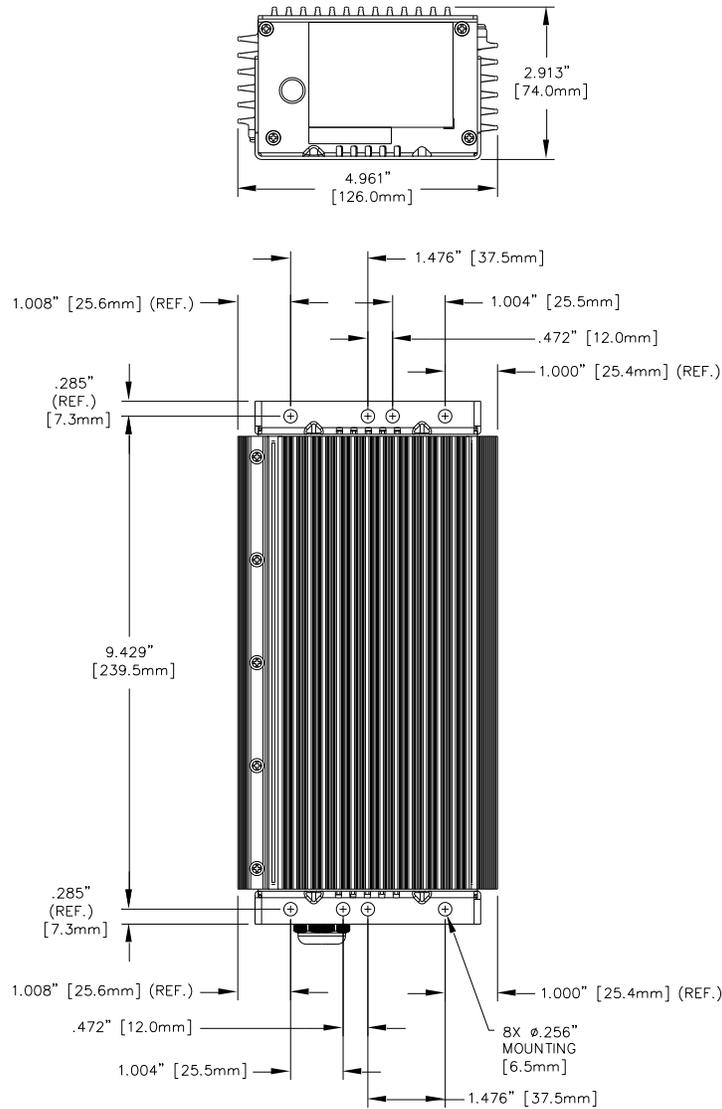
Charger Dimensions and Mounting Slot Locations
